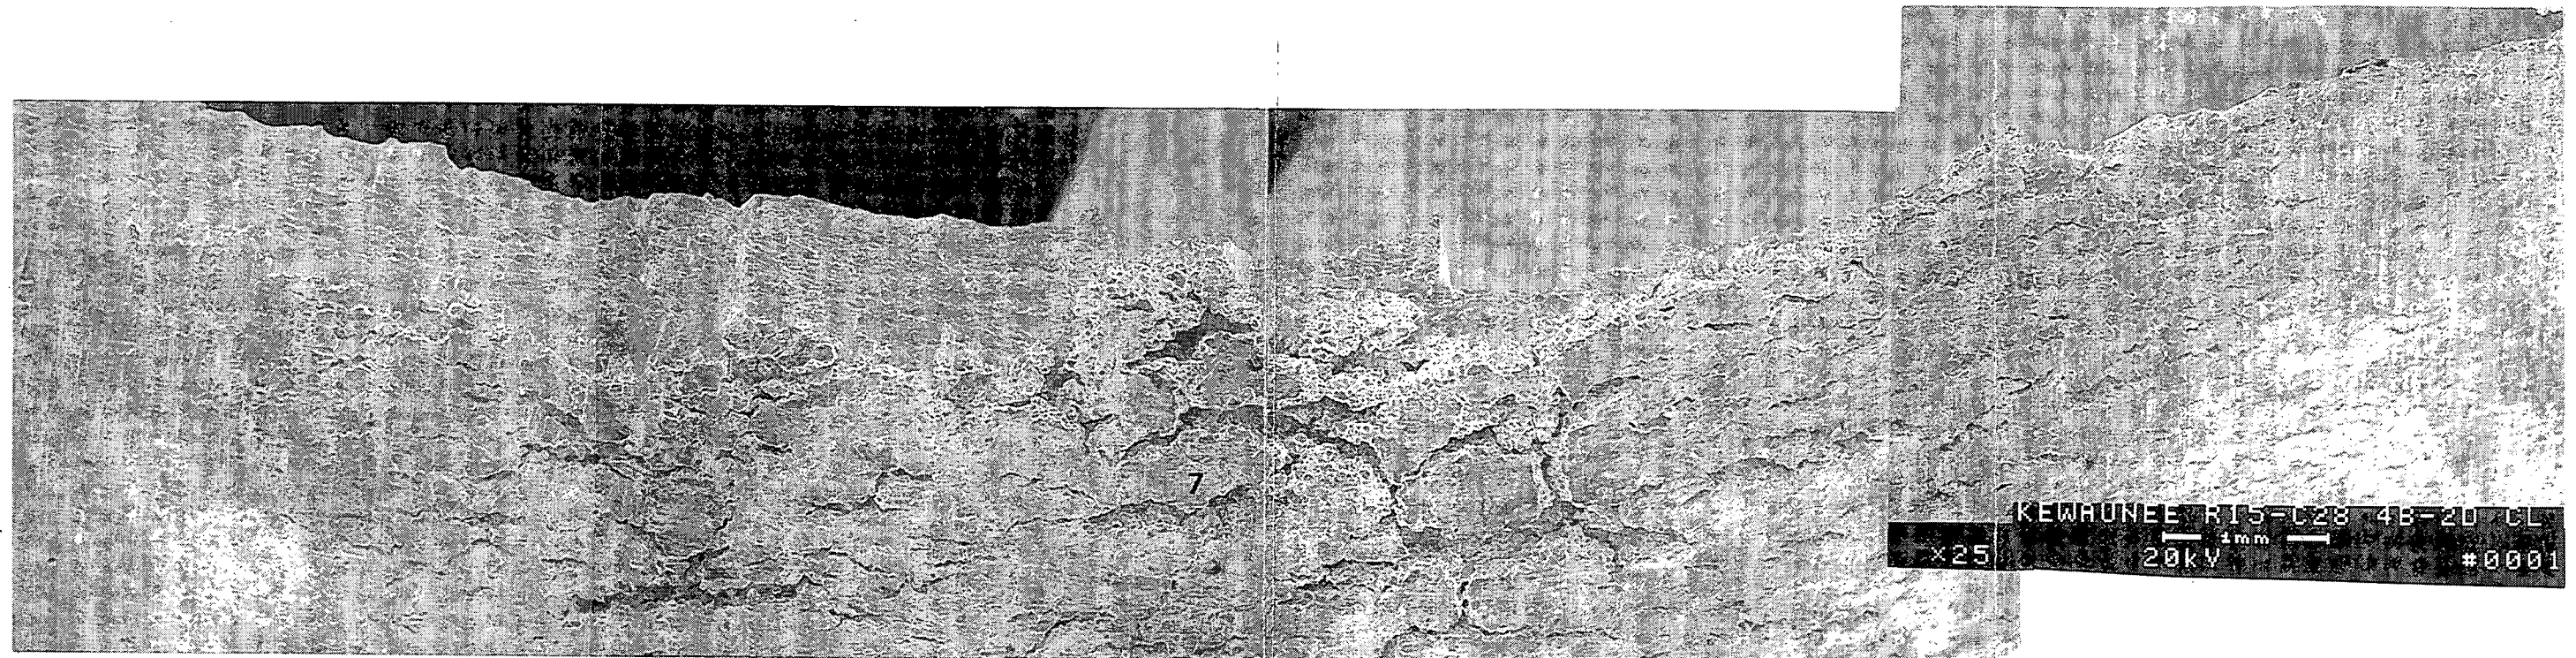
TSP1 crevice region Specimen 4B-2D of Tube R15C28. Side view of the opened burst fracture showing OD corrosion cracks opened wider by the burst test. Area 7 on the OD surface is shown at progressively higher magnifications in Figures 4-7 through 4-9.
